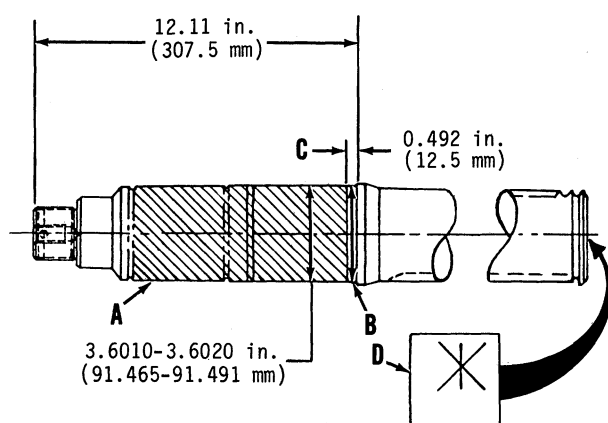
Axle shaft may be modified for installation of an undersize outer bearing if necessary. Refer to text for details.
